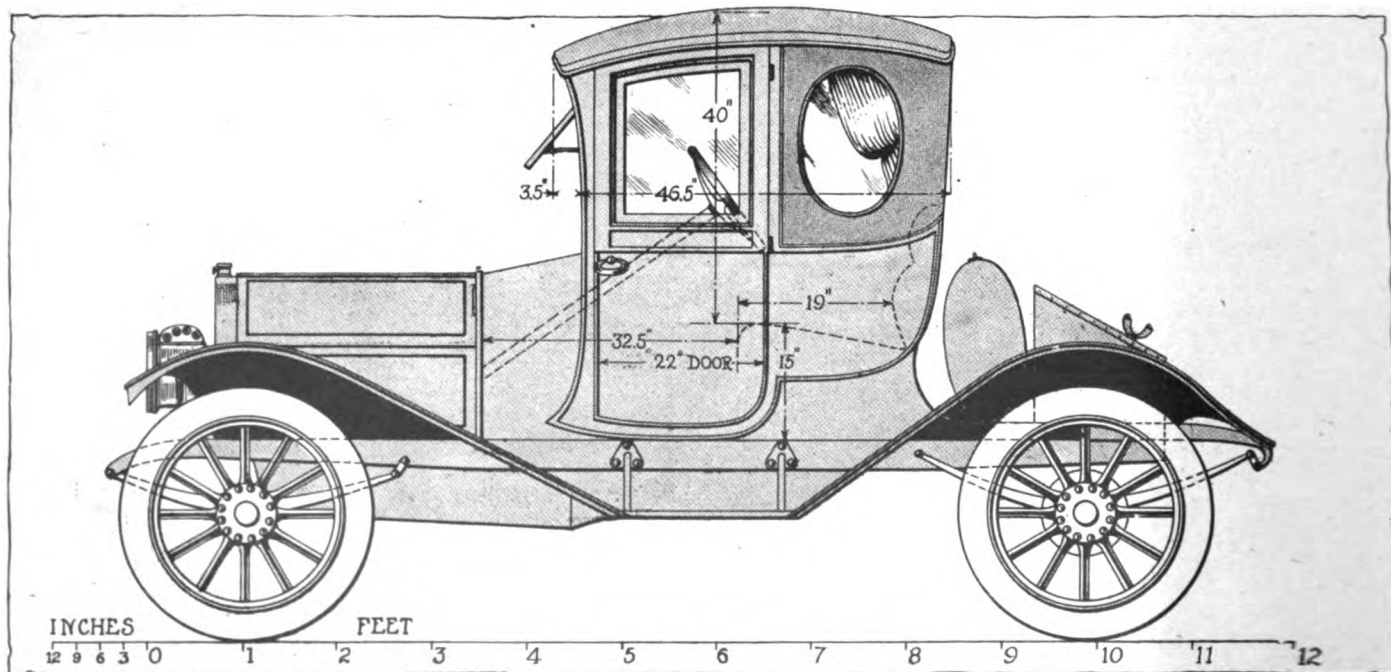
Side view to scale of suggested coupé design for 1912 Overland model 59-R
